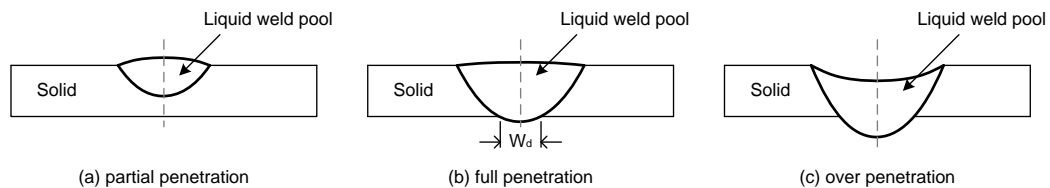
Illustration three penetration stages in welding process GTAW
